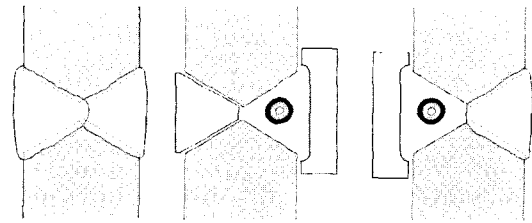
Two pass welding for double V-groove of consumable guide tube method ESW
